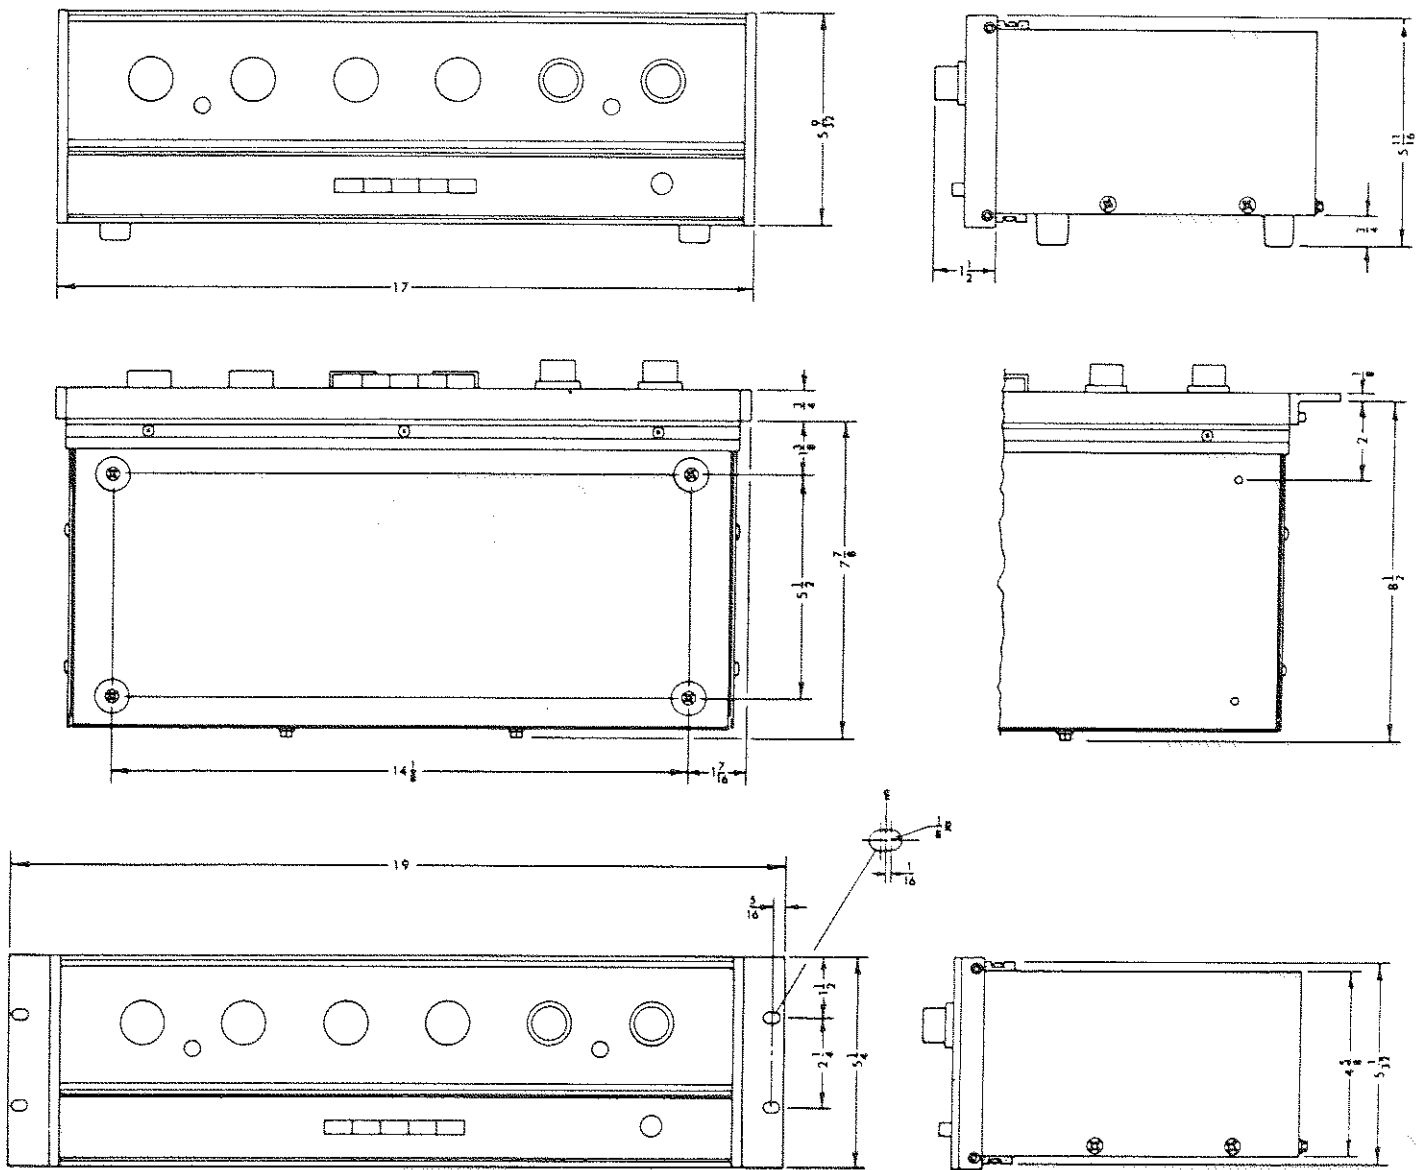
MOUNTING DIMENSION DIAGRAM
